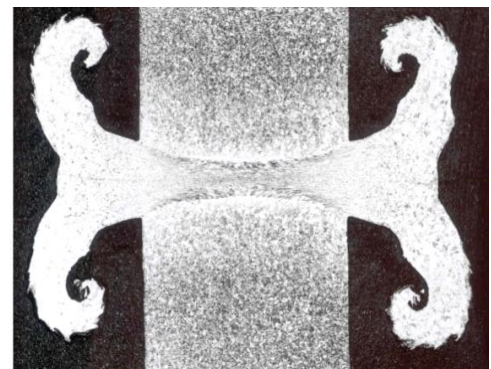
Several distinct zones of weld joint [9]
